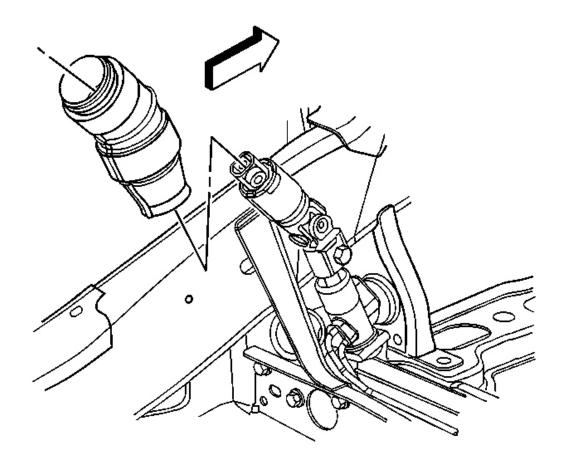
Removing/Installing Intermediate Shaft Boot Courtesy of GENERAL MOTORS CORP.
